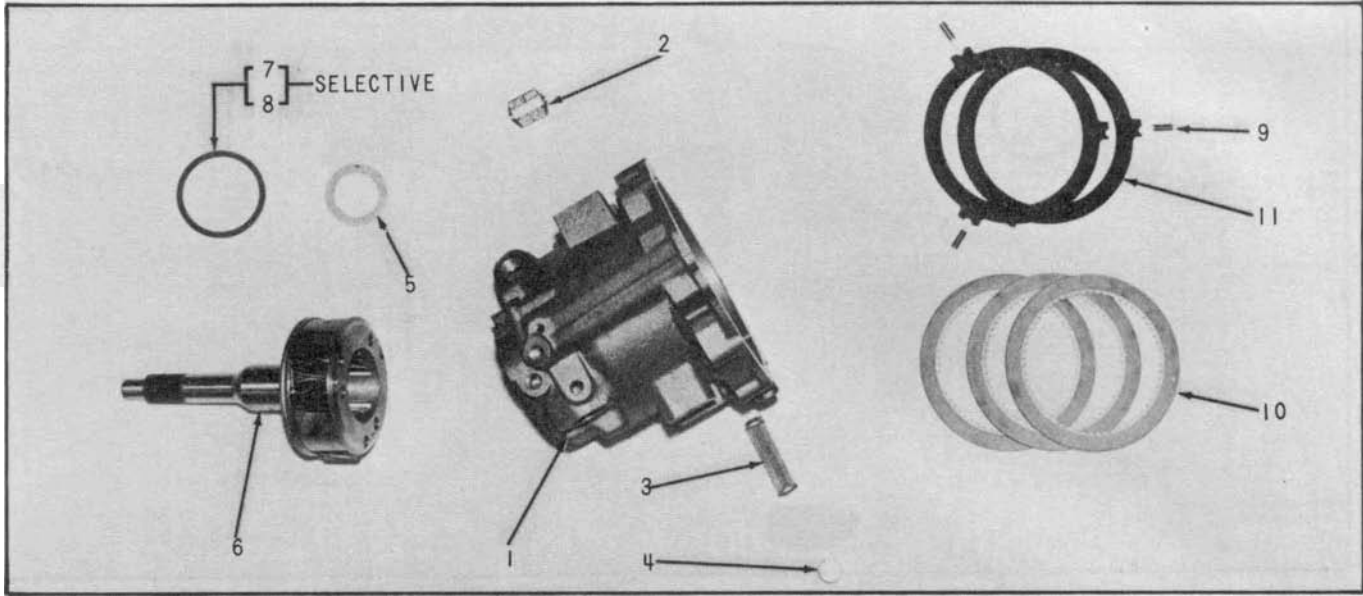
Parts Display for Forward & Reverse Section of the AS13-72C Transmission. Only Those Parts Different from the AS11-72C Assembly are Illustrated.
